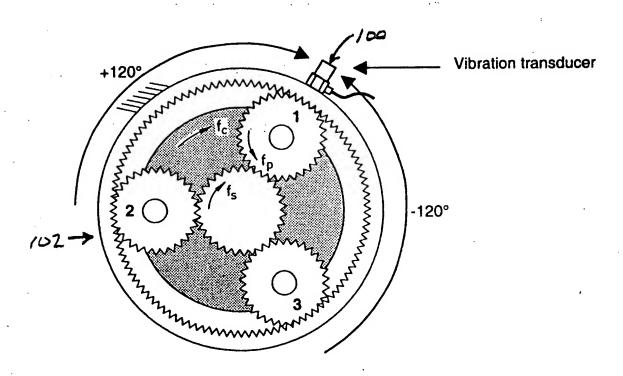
Phase shifts required to align the separated sun gear averages in a three-planet gear train.
